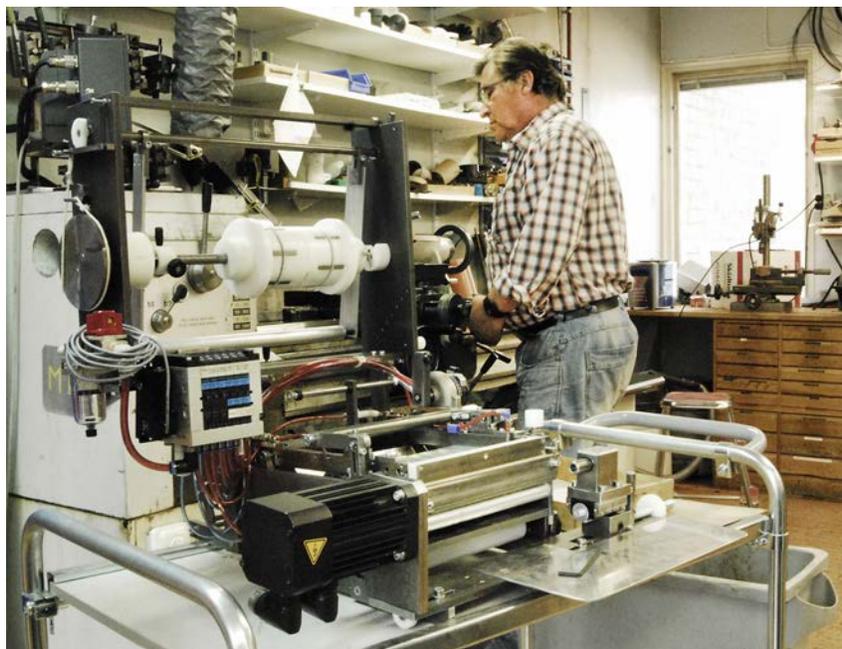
A senior machinist operating a metal lathe with prototype coil-winding machine shown in foreground.
